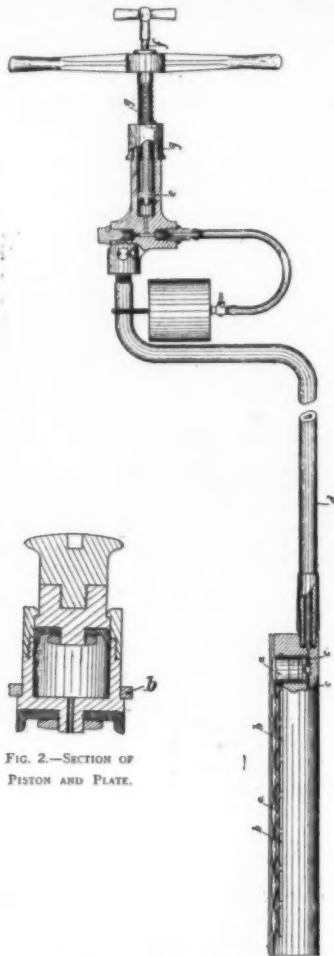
Sectional elevation of the hydraulic mining cartridge.
